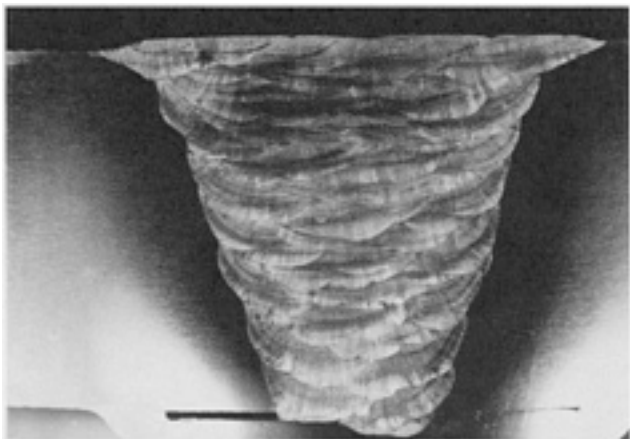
25-mm (1.0-in.) type 304 stainless steel plate, shielded metal arc weld. Heat input: 1.0 MJ/m. Macrograph shows epitaxial grain growth resulting in continuous columnar grains occurring through successive passes in a multiple-pass weld. 10% oxalic acid electroetch. 2×
